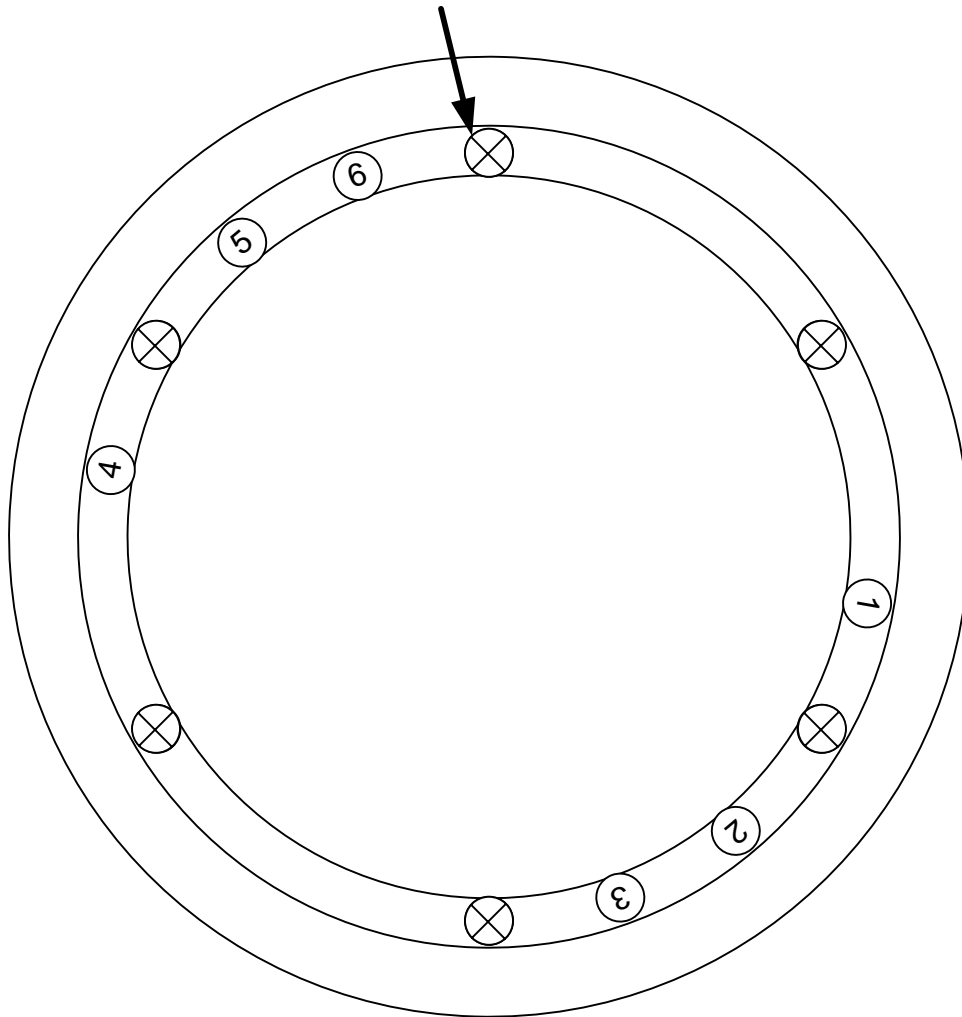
Screw weight holes and spinner mounting holes (marked with "X") as viewed from the aft side of the spinner.
